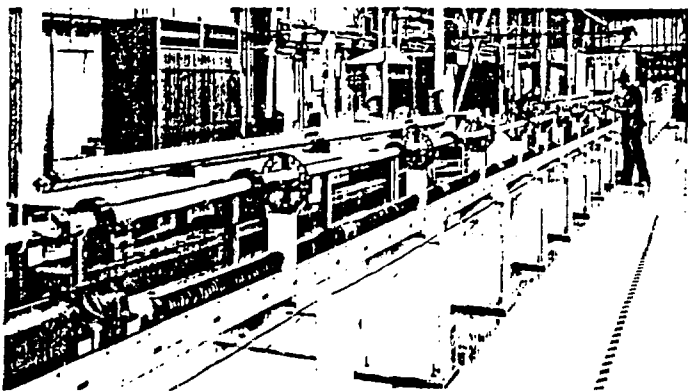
Coil winding fixture. The fixture is designed to accommodate dipole coil segments of arbitrary length up to a maximum length of 16.7 m.
